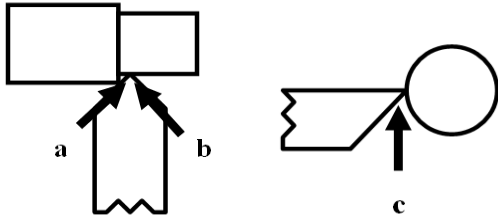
Three different positions for applying liquid nitrogen cutting fluid a: on the tool face along the principal cutting edge, b: perpendicular to the principal cutting edge, c: from the bottom through the gap between the tool flank and the workpiece.
